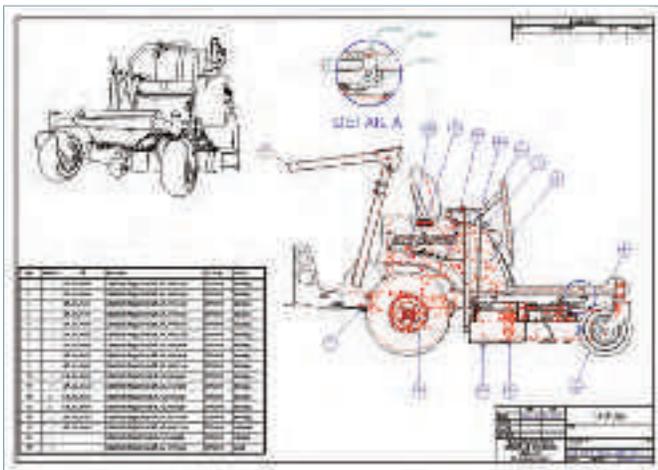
Assembly drawings in Solid Edge can be created with QuickSheet templates where drawing views, parts lists and item ballooning are created automatically. Full dimension and annotations let designers create production-ready drawings with minimal effort. (Model image courtesy of the Magic Circle Corporation)
